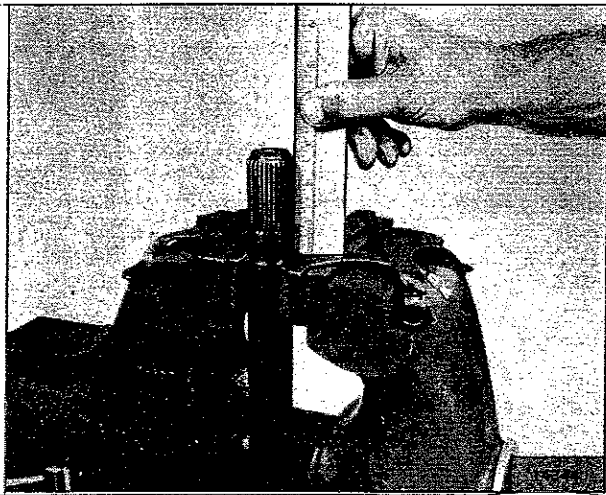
AXLE SHAFT POSITIONED IN VISE
